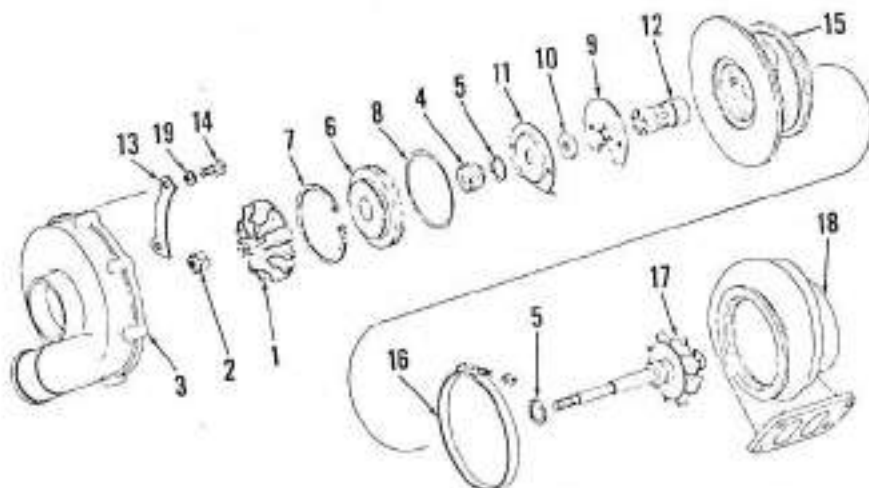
C—Exploded view of turbocharger used on 1410 and 1412 model tractors. Not shown is a thin flat steel washer located between bearing (12) and thrust plate (9).
